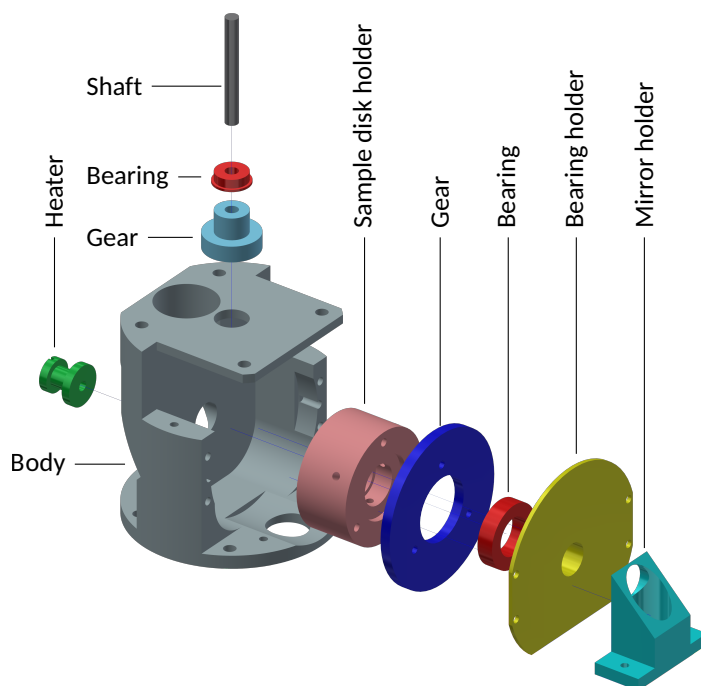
Rotating Voigt probe exploded layout. Fasteners have been omitted for clarity. Light enters the probe from the opening on the top left, is reflected horizontally, passes the sample disk holder and is reflected down towards the bolometer. Mirrors, not shown on the picture, are glued to the ends of the openings on the horizontal optical axis.
